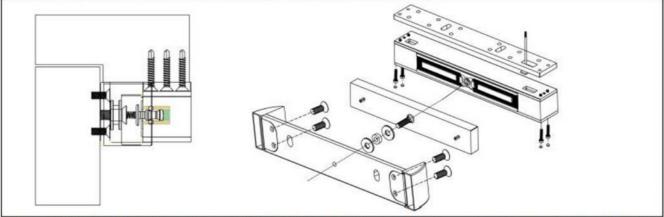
MEM2400-LP and Security Bracket (SEC 2400) installation for out-swing metallic door, sex bolt is not used.
